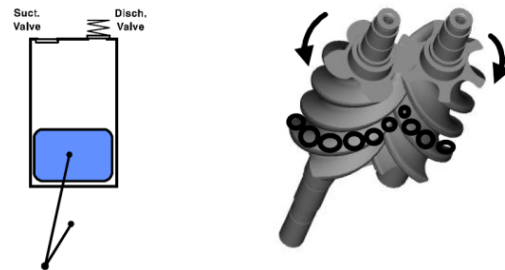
How compressors are started Compression back the fluid in left reciprocating and right twin rotary screw compressor
